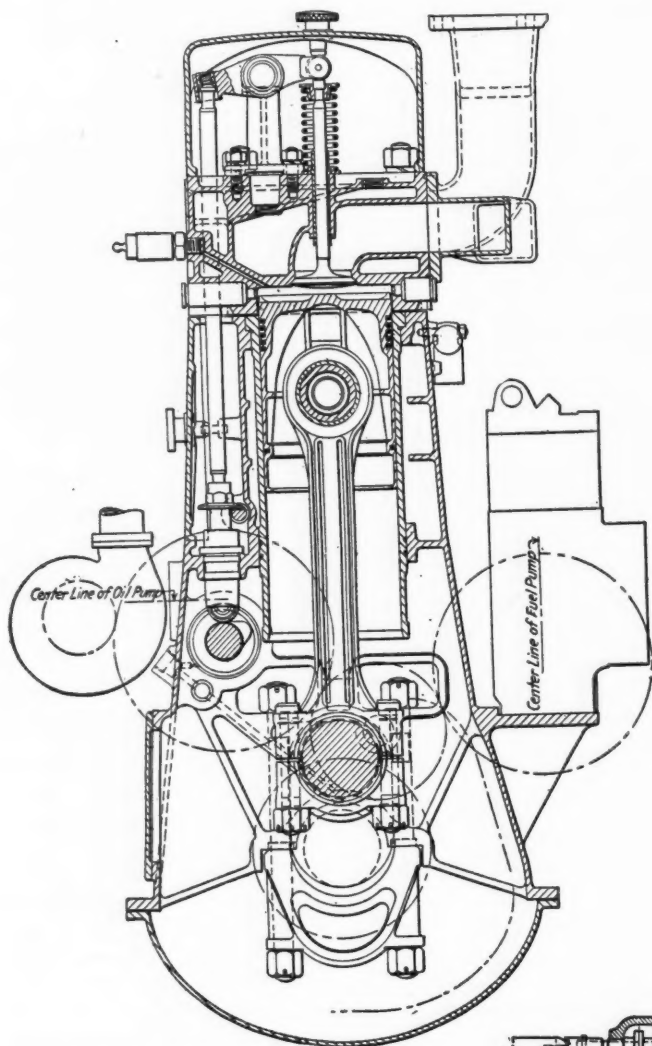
Cross section of new design of M.A.N. Diesel truck engine
